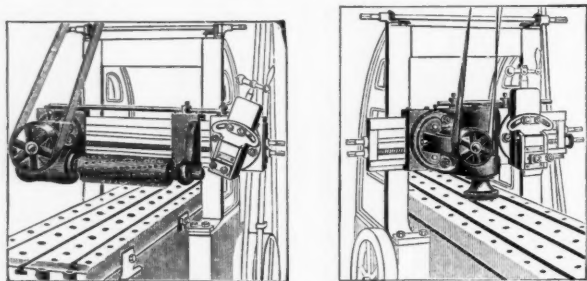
Attachments; the Adams Co., Dubuque, Ia.
